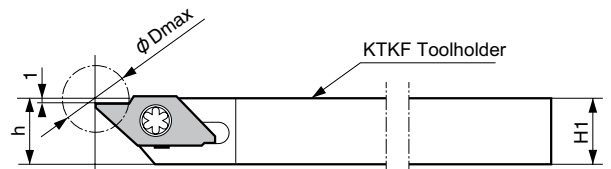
When a TKF-AS insert is attached (The cutting edge is 1 mm lower than the center line.)
